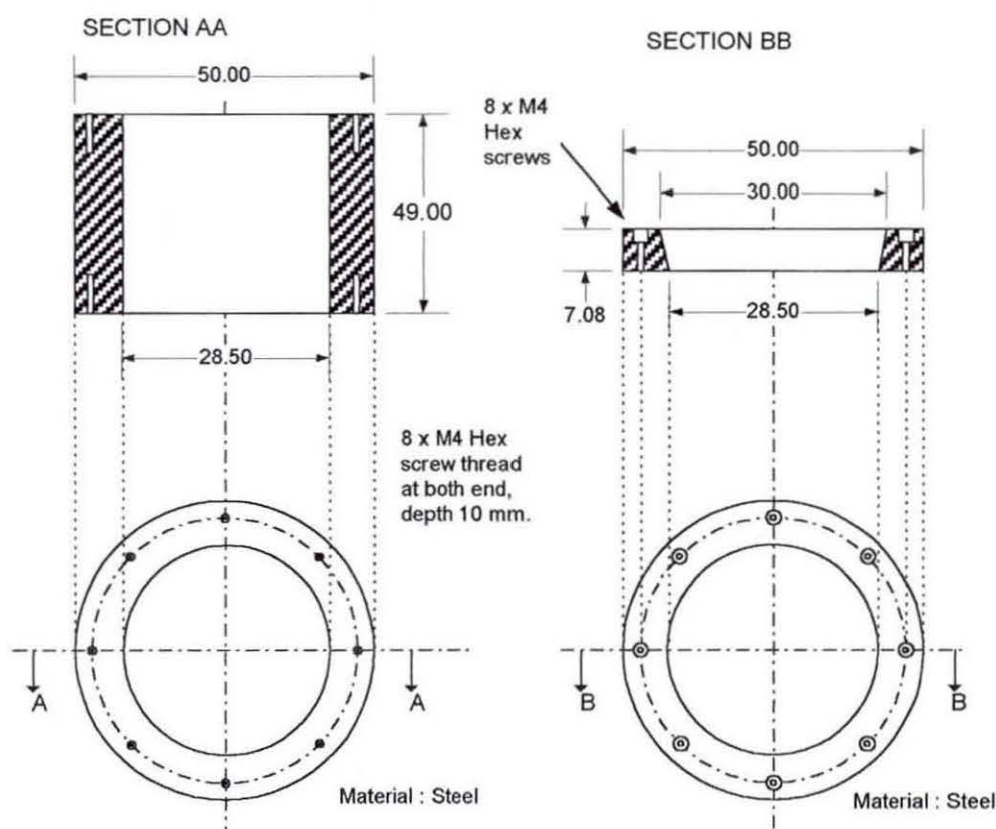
Drawing of cylindrical current conductor and end-piece.
